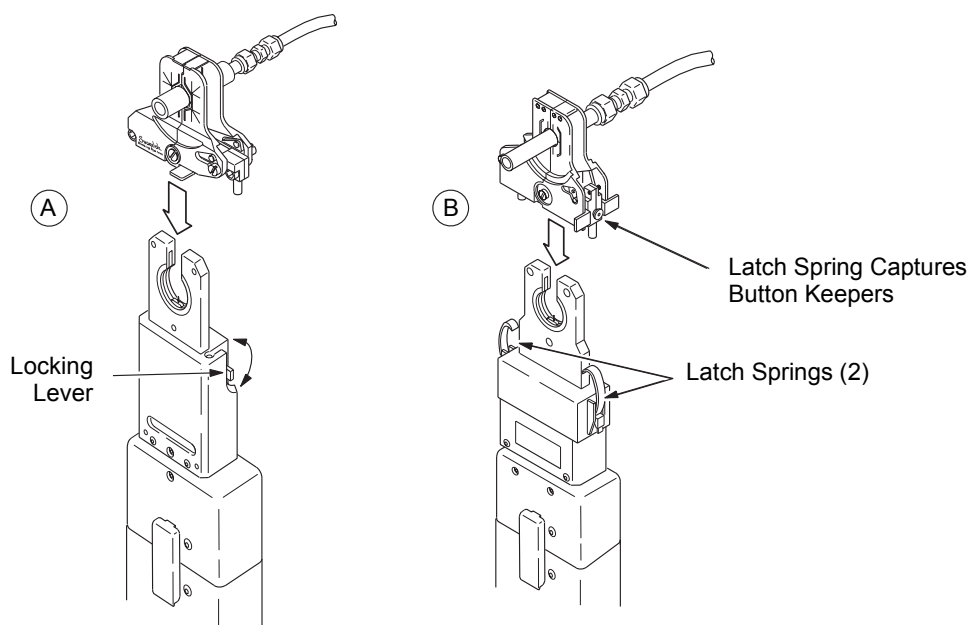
Placing the Fixture on the Micro Weld Head
